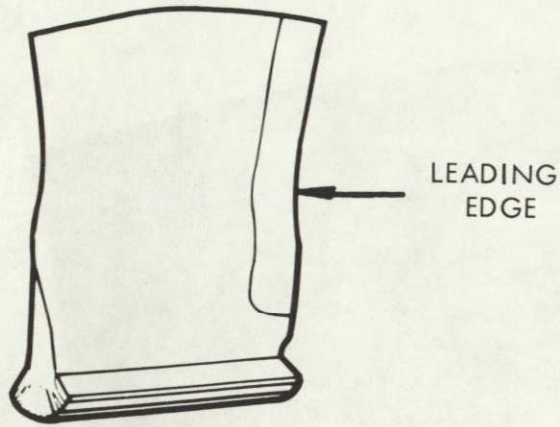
Final Molded Blade in Root Pressure Pad Bonding Fixture.
